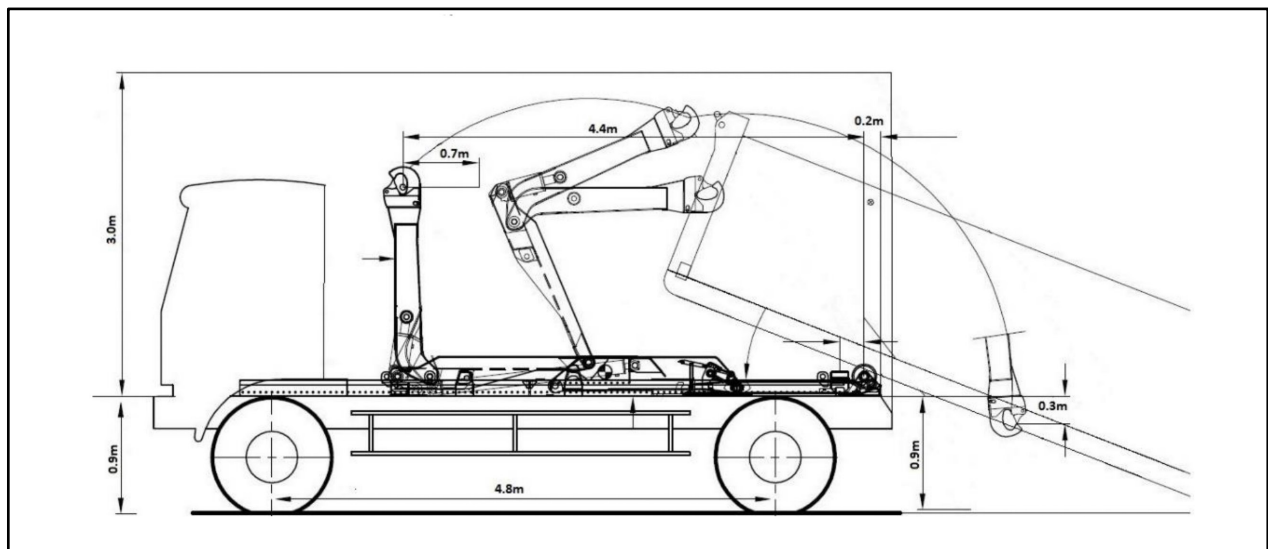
Typical Hook Lift Waste Collection Vehicle Configuration
